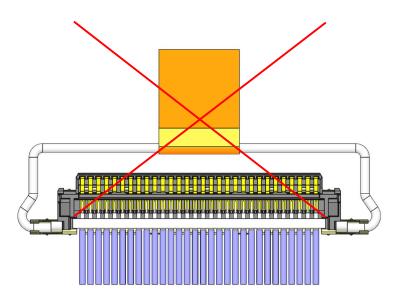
Pull-Tape Caution of Pull-Tape Dimensions
